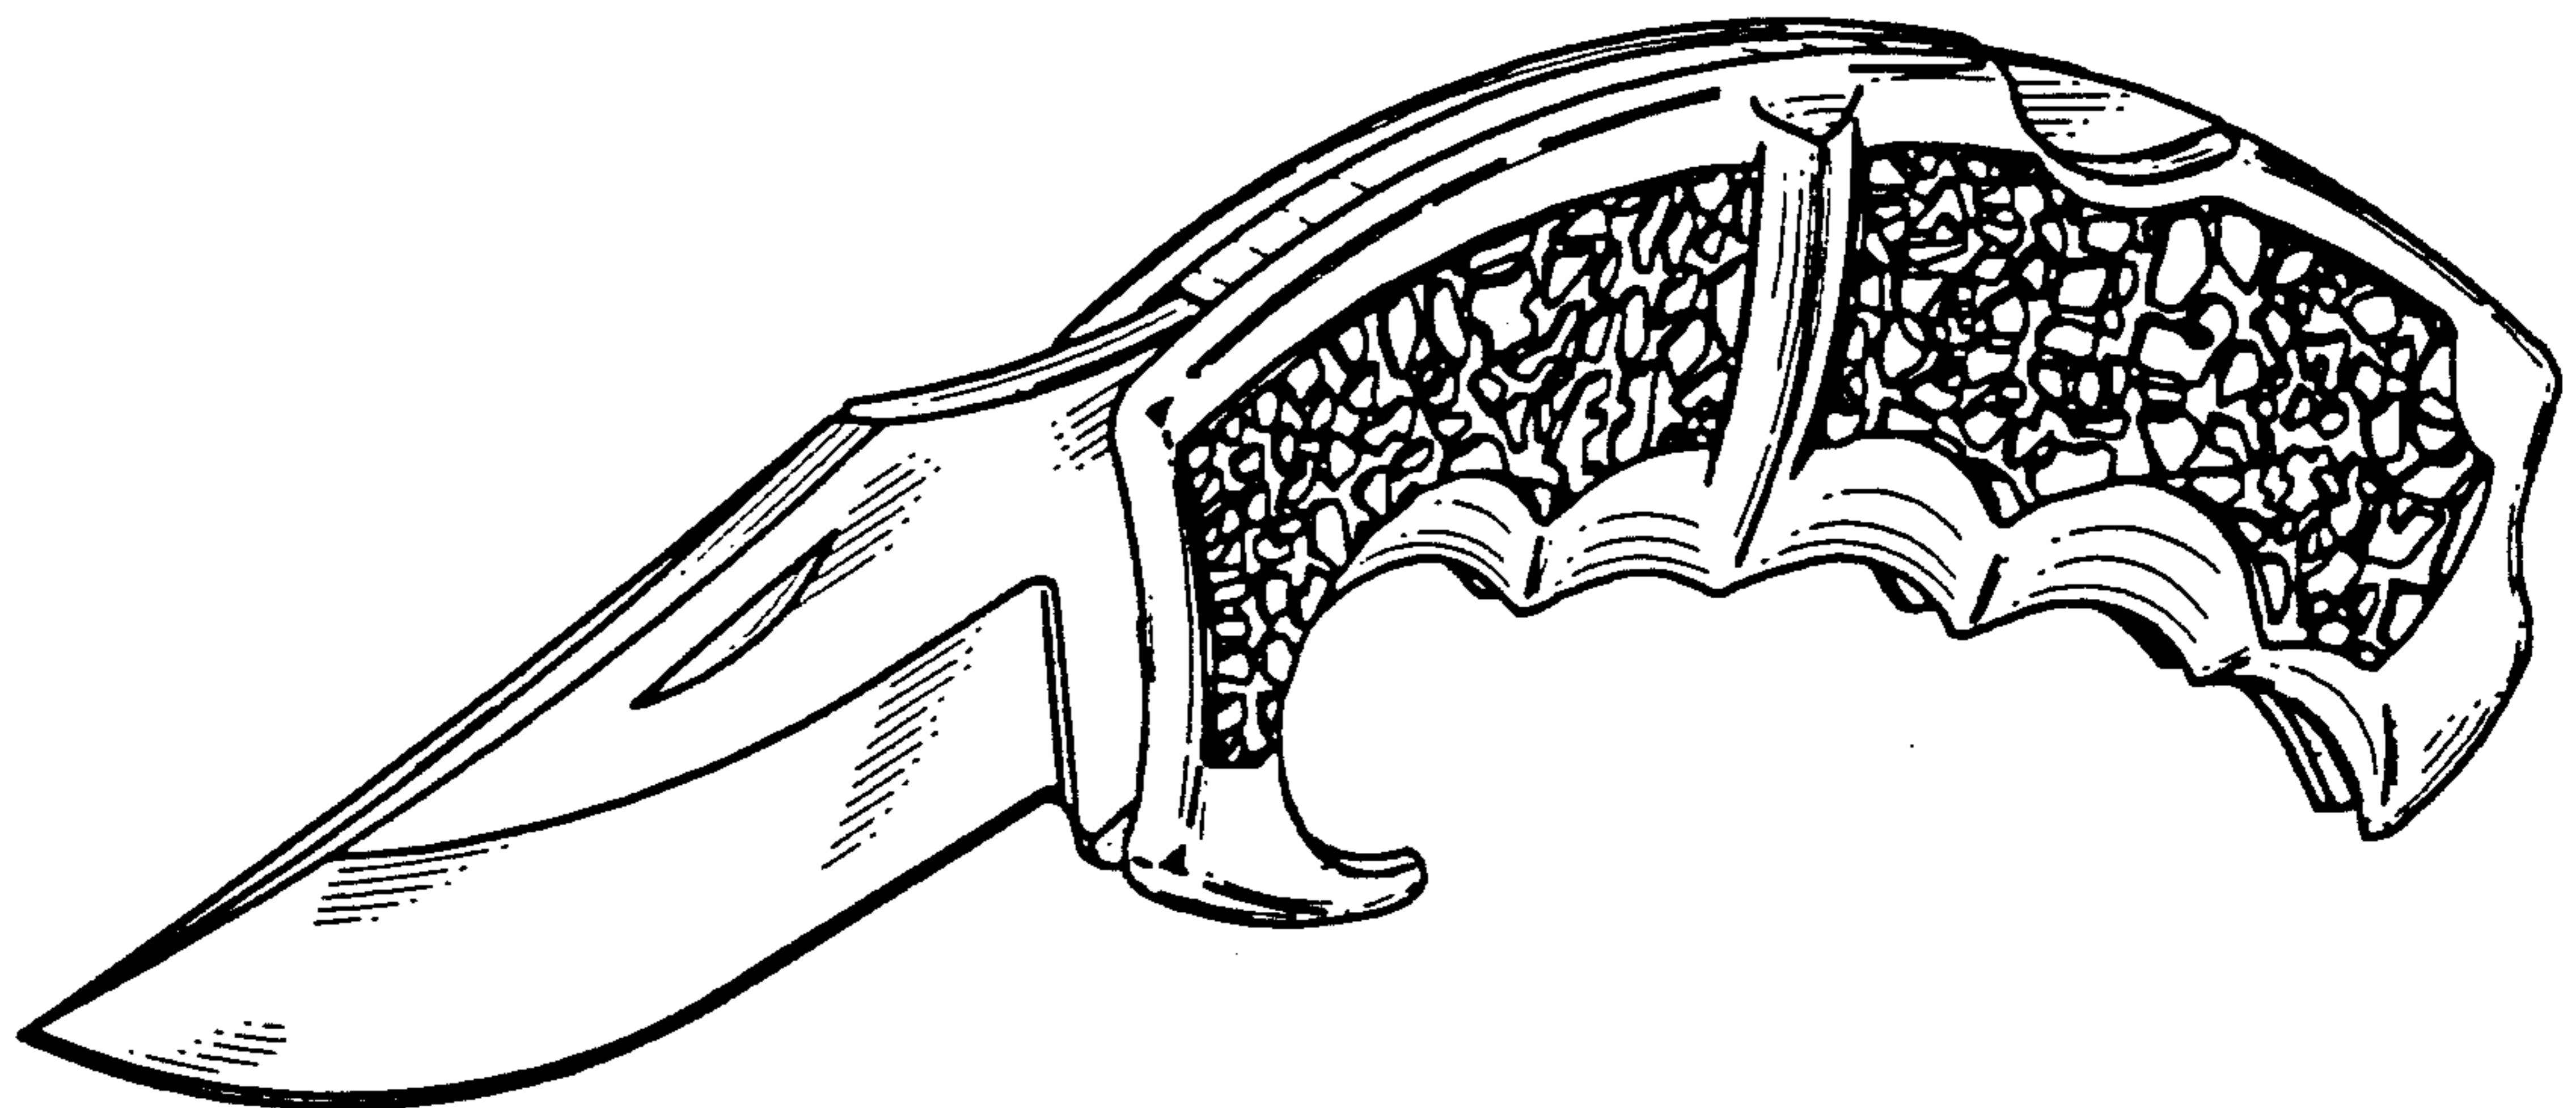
is a top plan view of the modified embodiment in the second opened position;
